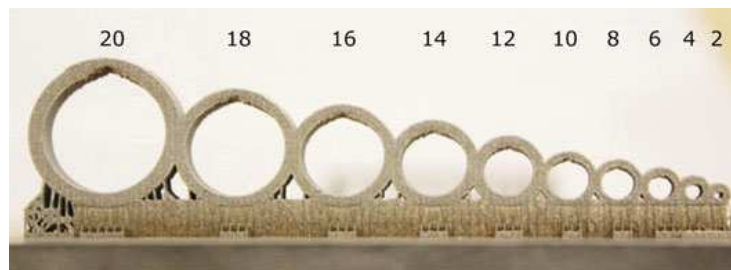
LM-manufactured horizontal holes without supports benchmark [12]
